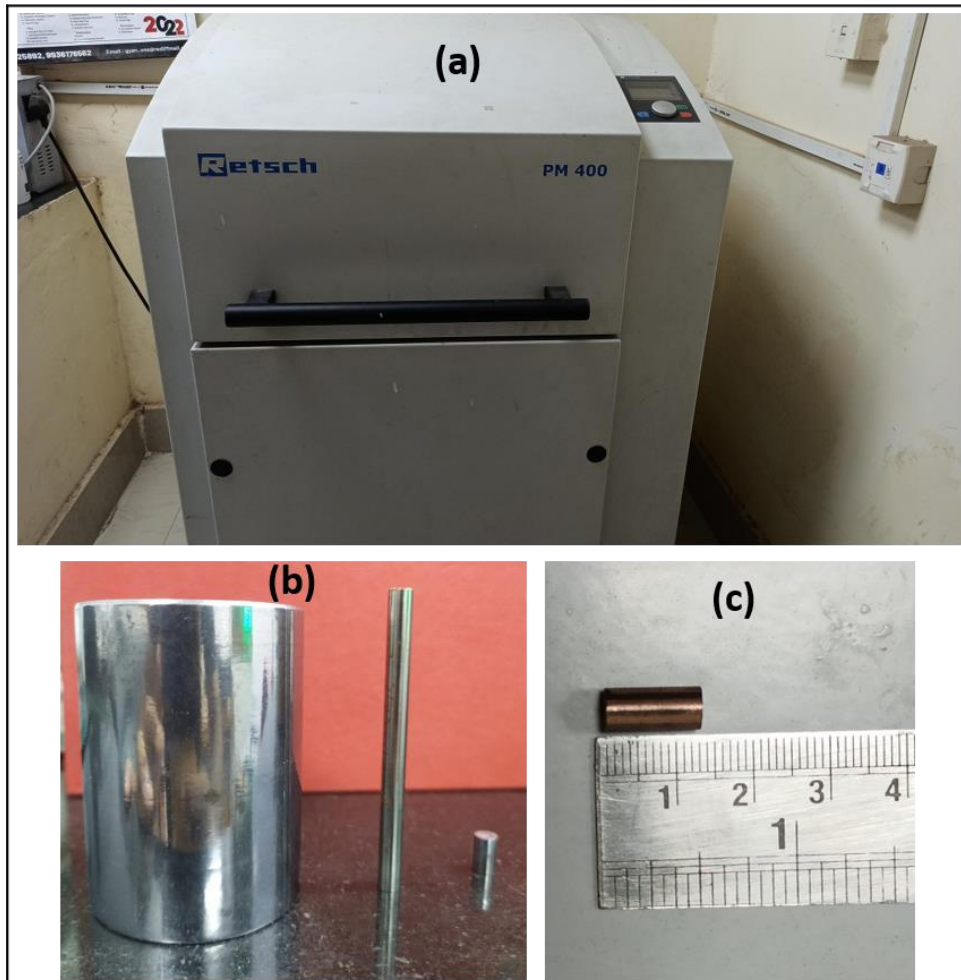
(a) PM400 milling machine, (b) Compaction die and punch and (c) Sintered sample
